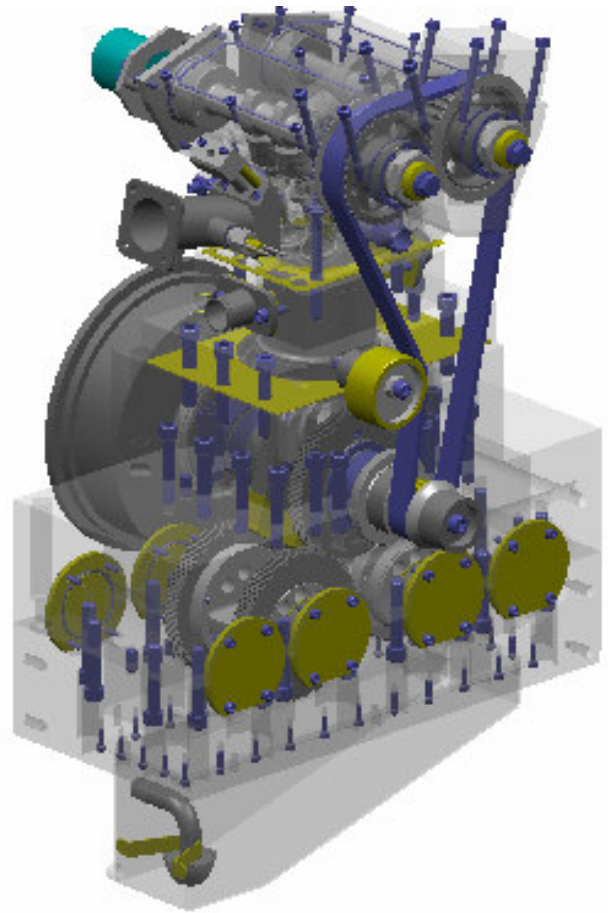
Ghosted view of thermodynamic engine with mechanical valve drive mechanism and outrigger bearing system
